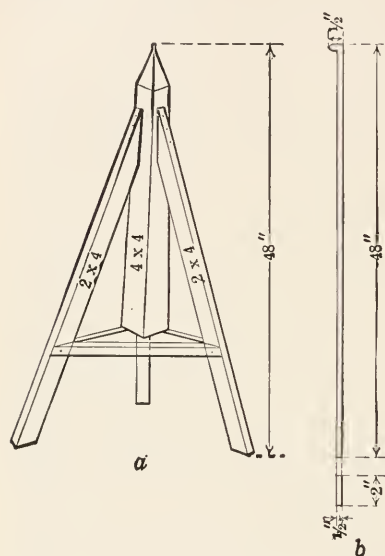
Lumber Jacks used in piling Lumber. *a*. A wooden-framed Jack. *b*. A metal Bar Jack.
